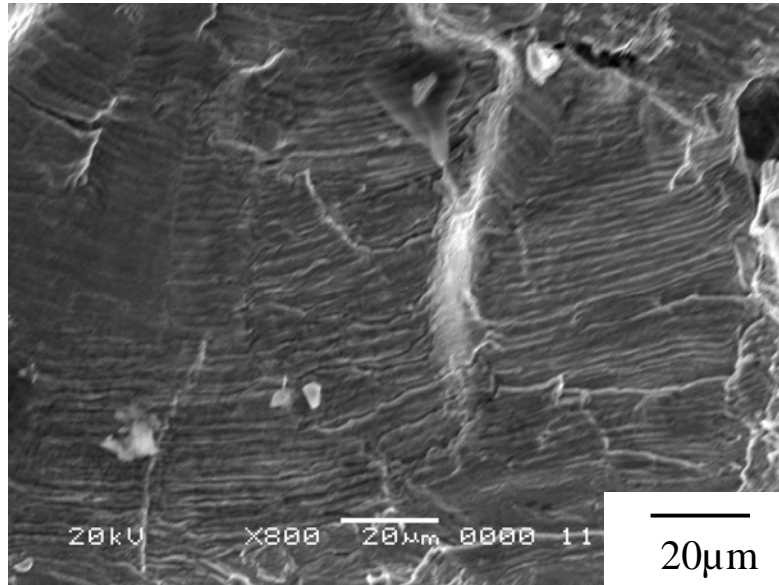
Striation observed on thermal fatigue fracture surface
